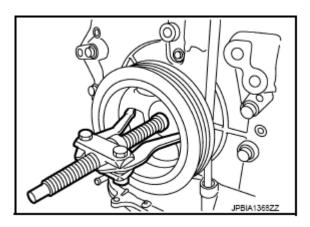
Identifying Puller Tabs In Holes Of Crankshaft Pulley Courtesy of NISSAN NORTH AMERICA, INC.
